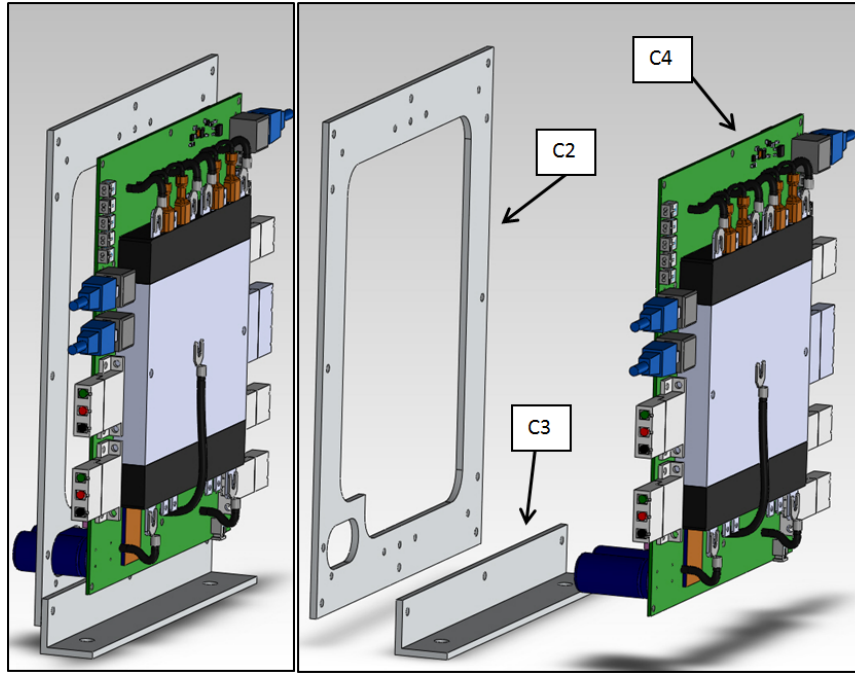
Exploded view of the BBB submodule that handled power input. The BBB PCB was held away from the plate with board spacers.
